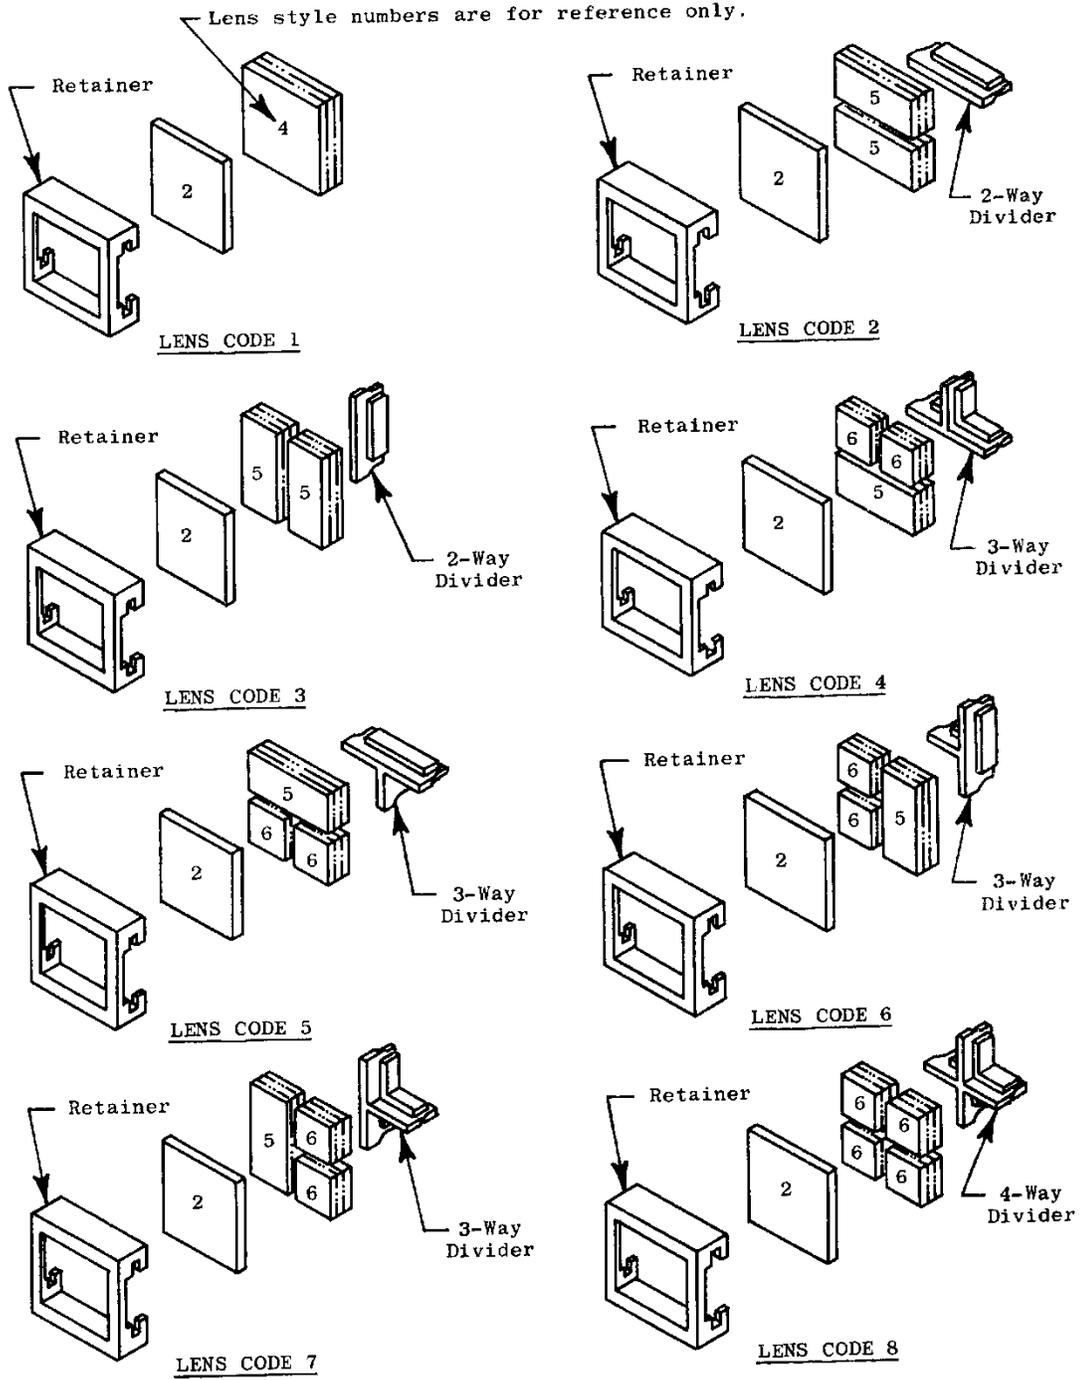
LENS ASSEMBLY DIAGRAM, TYPE W
